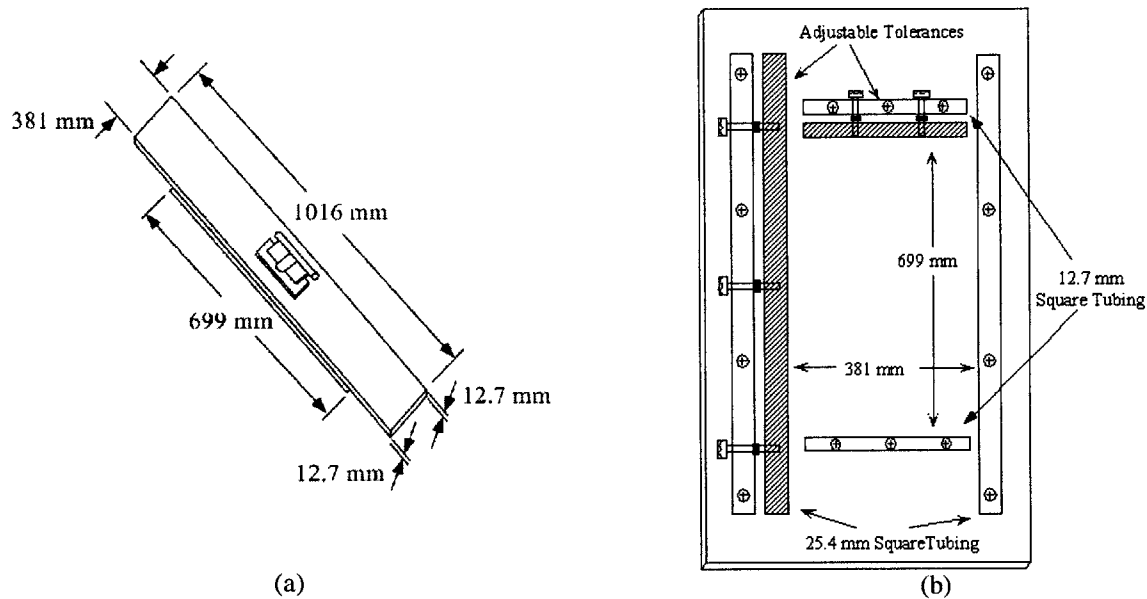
Nozzle Dam Center Plate (a) and Variable Tolerance Receptacle (b)
